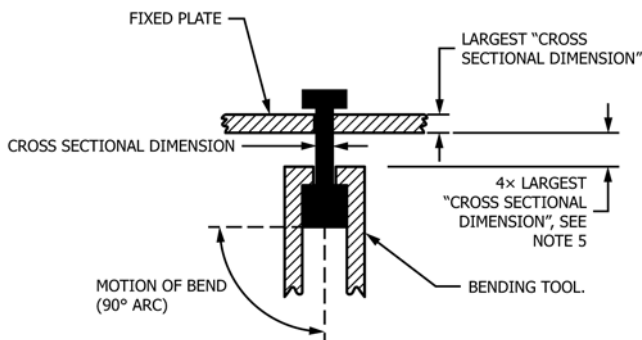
Schematic Drawing of Bending Test Fixture as Applied to Groups 3 and 4
